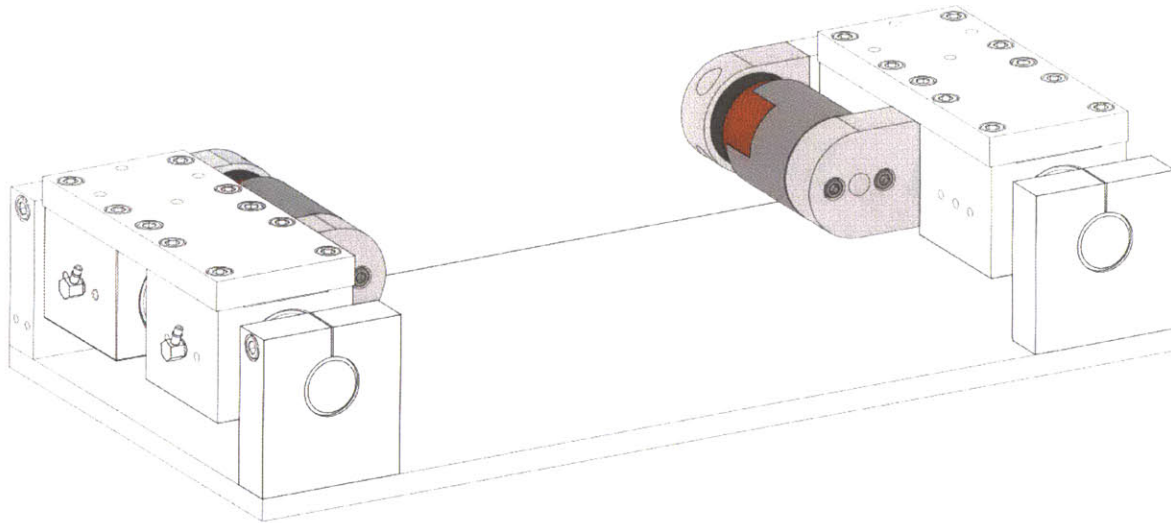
Print head construction: Each linear stage is actuated with a voice coil. The coil side of the voice coil is mounted to the stationary guide rod mount, while the magnet side of the voice coil is mounted to the linear air bearing stage. There is no contact between the two parts of the voice coil, so there is no mechanical friction due to this actuator.
